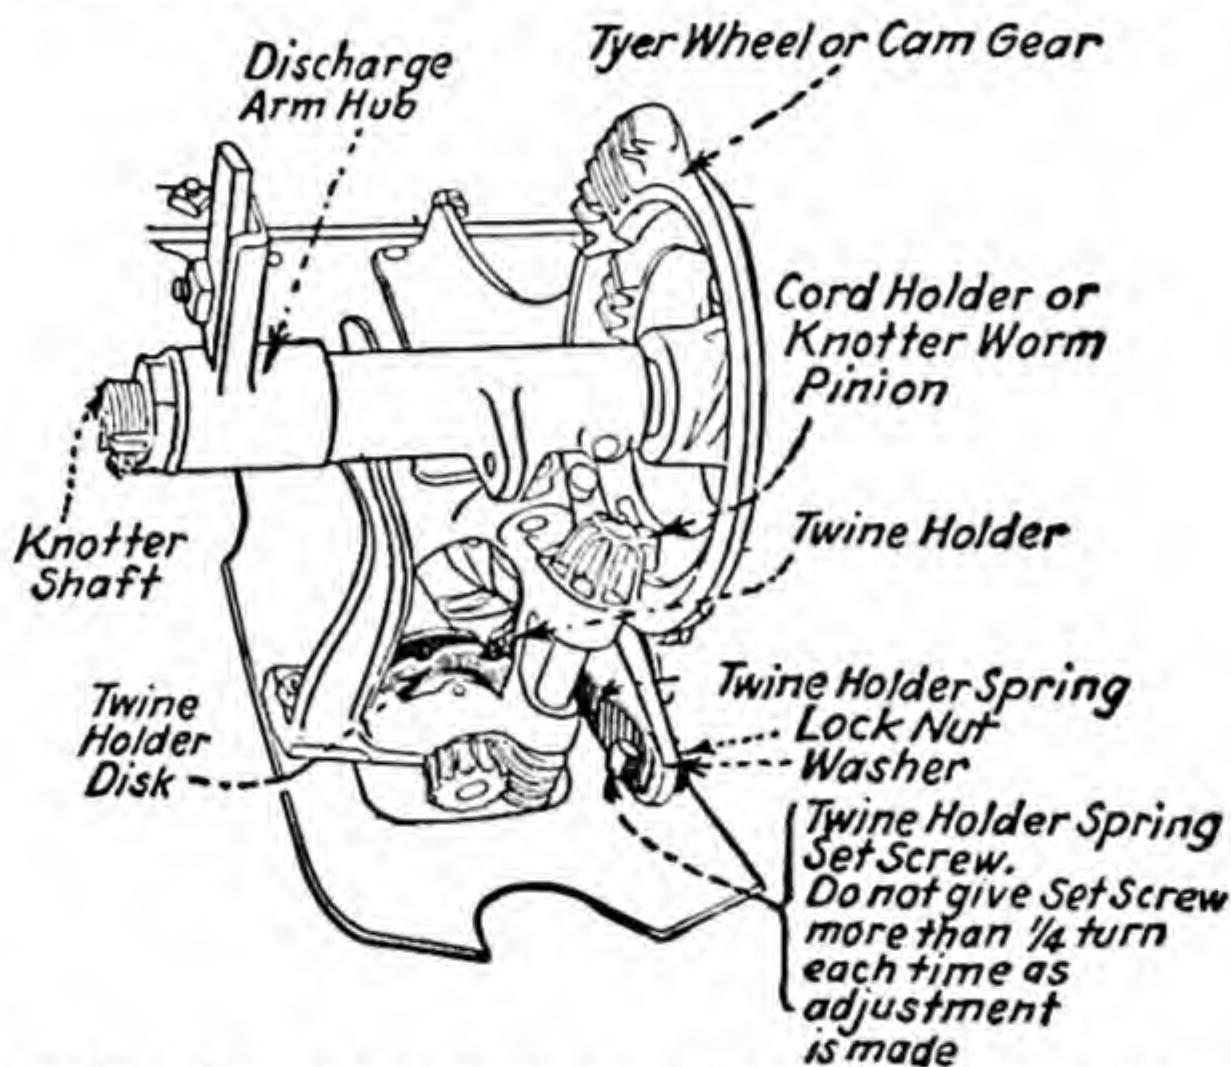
Another view of the knotter head shown in Fig. 489a, showing twine disc holder and twine disc spring.
